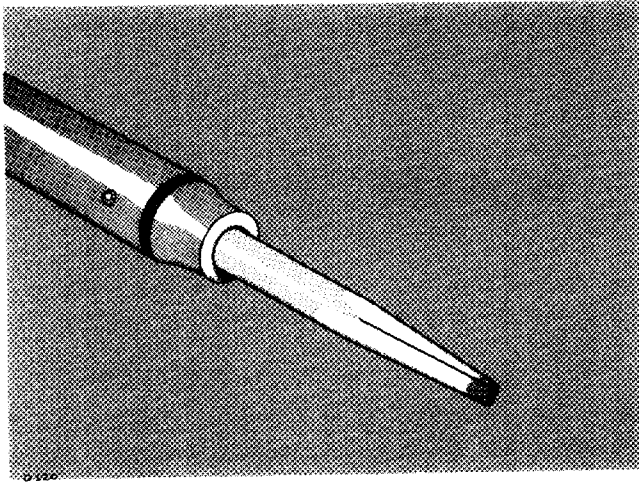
Soldering iron tip properly shaped and tinned.
